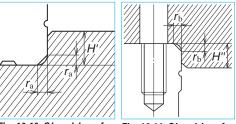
Shoulder for Fig. 10.11 Shoulder for the rail datum the slide datum surface surface
